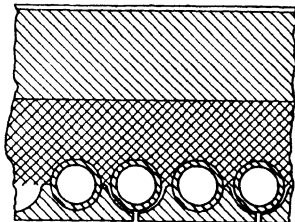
Waterwall tubes protected by cast-iron blocks fused onto every other tube. (*Springfield Boiler Company.*)
